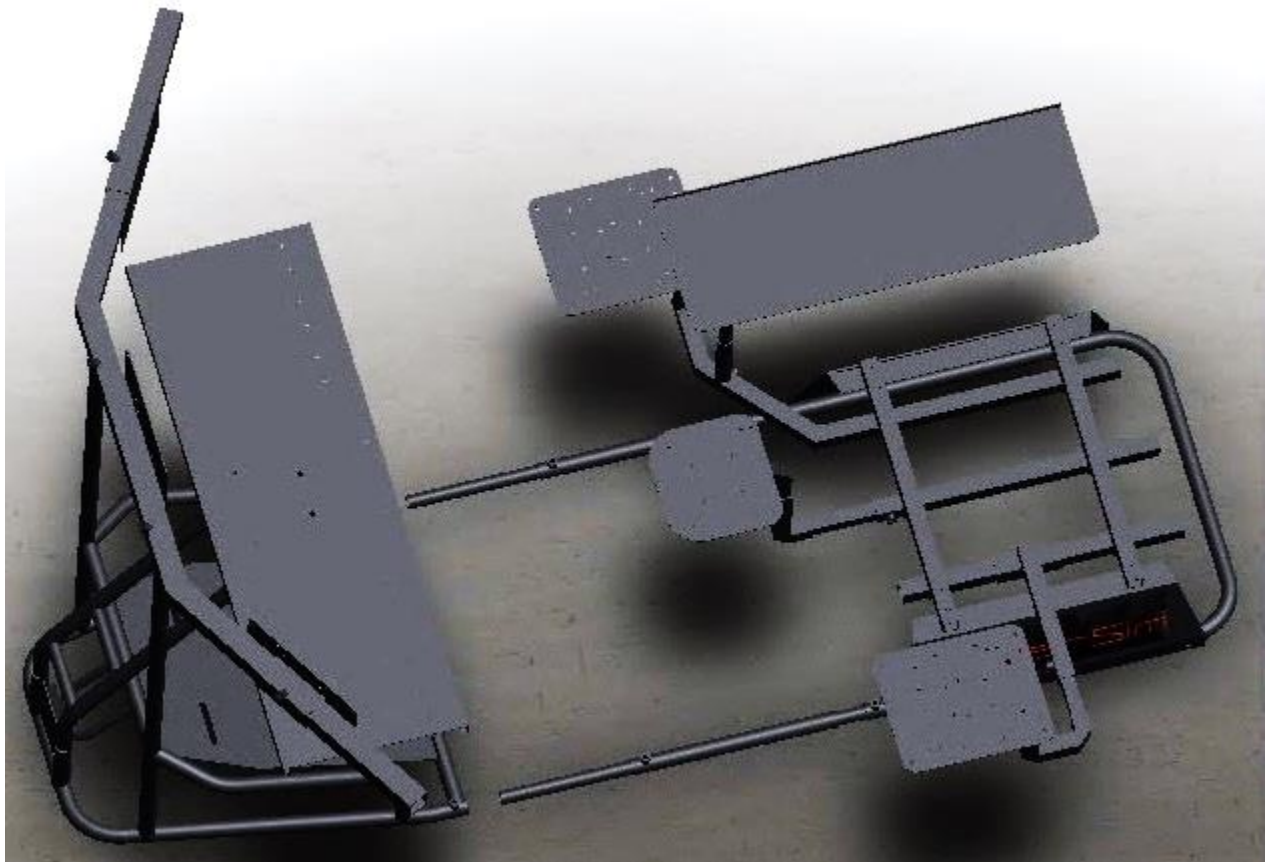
D: COMPLETED MOUNT ASSEMBLY
